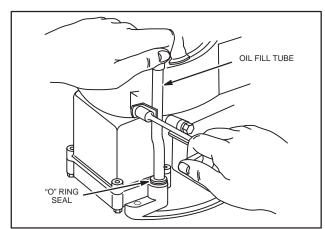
EXTENDED OIL FILL TUBE AND DIPSTICK
